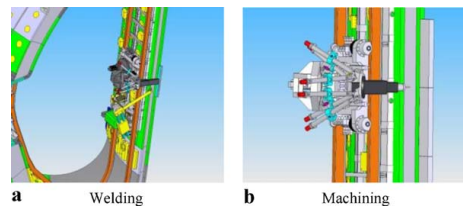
Welding and milling process: (a) welding and (b) machining.
